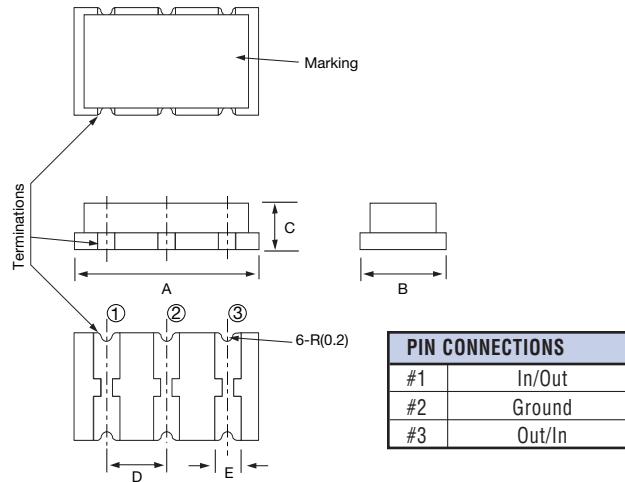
ECS-SR-B Series - Top, Side, Bottom & End views
